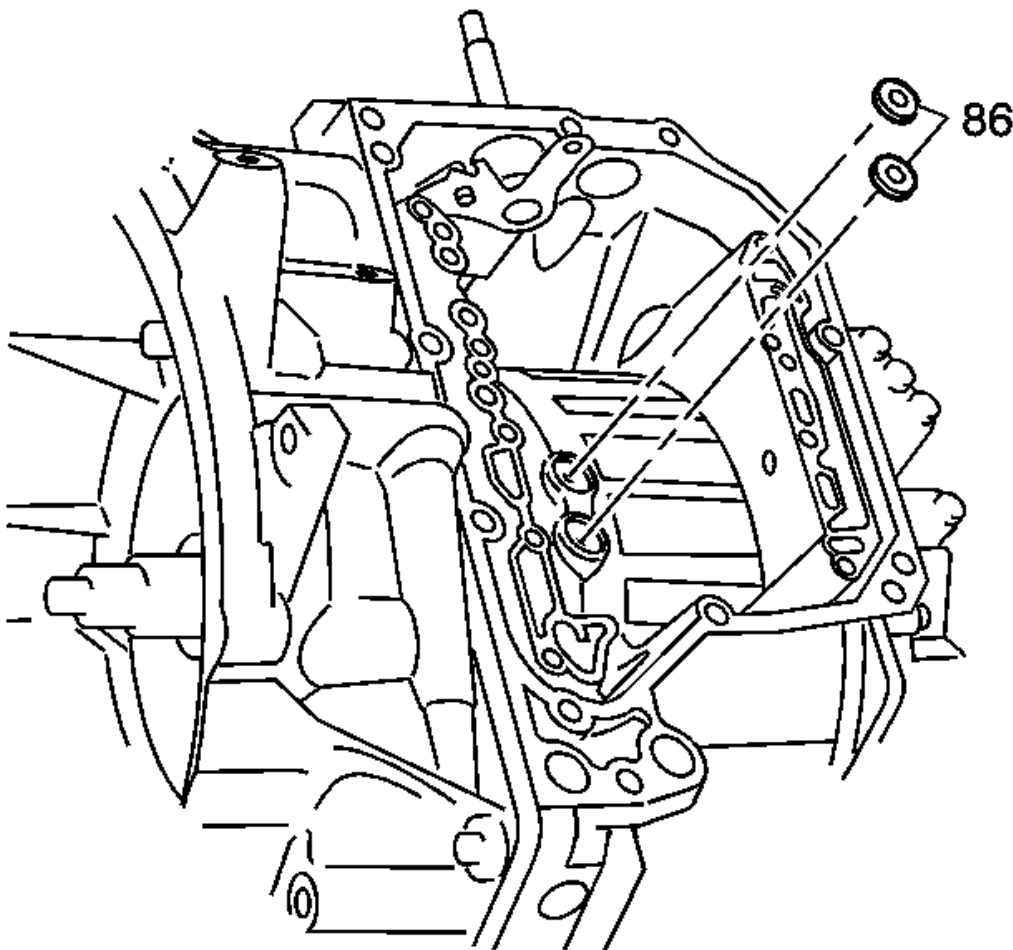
Identifying Control Valve Lower Body Assembly Components
